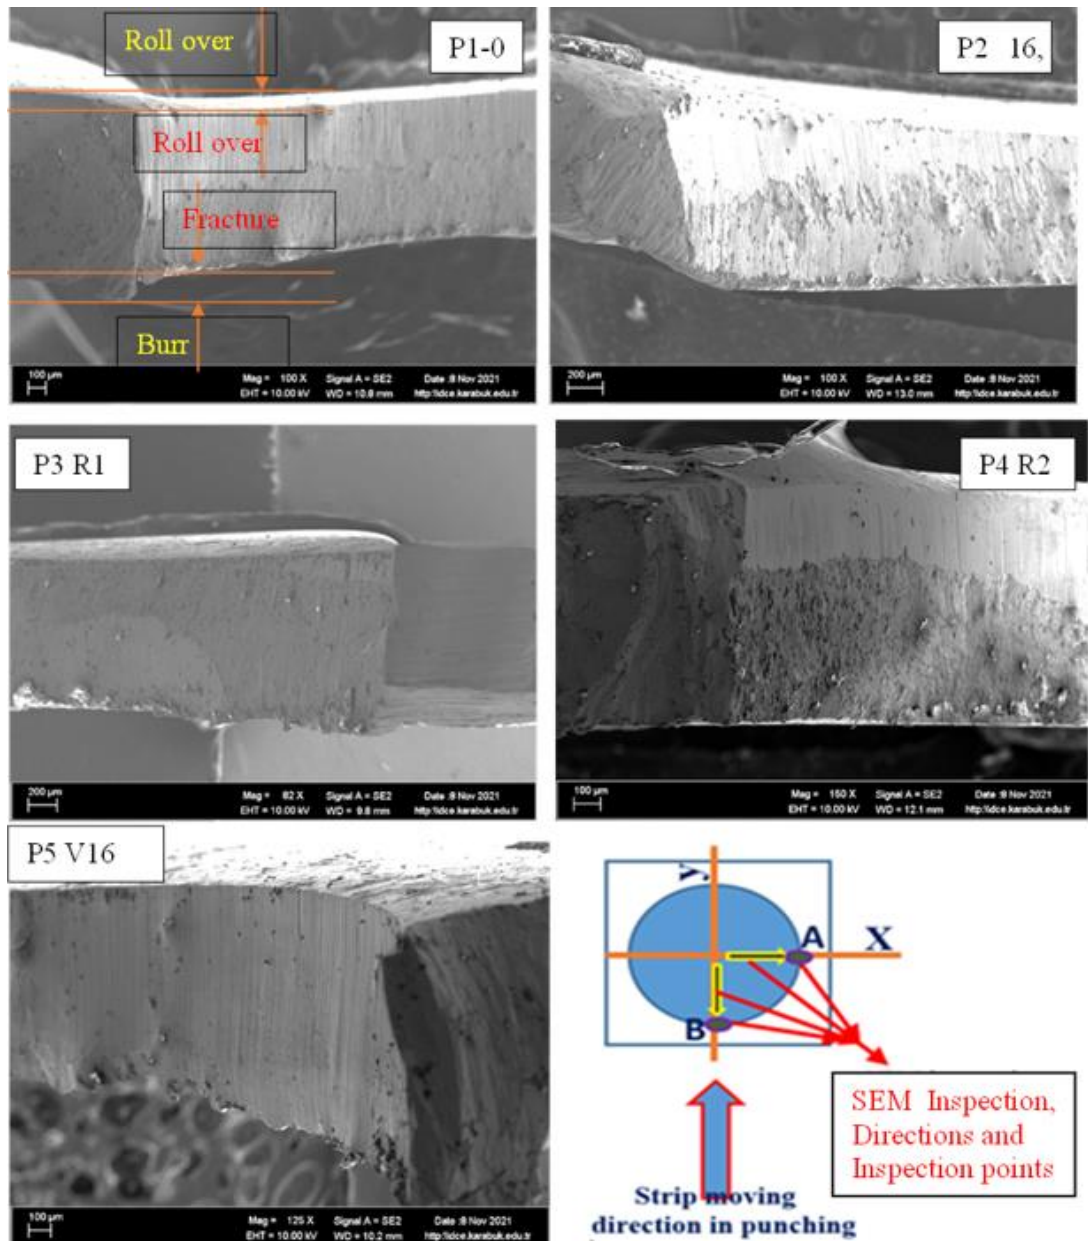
SEM photos of the DP 1200 sheet samples' shearing cross surfaces, labelled P1 (0), P2 (16), P3 (R1), P4 (R2), P5 (V16), and inspection schema, at position A.
